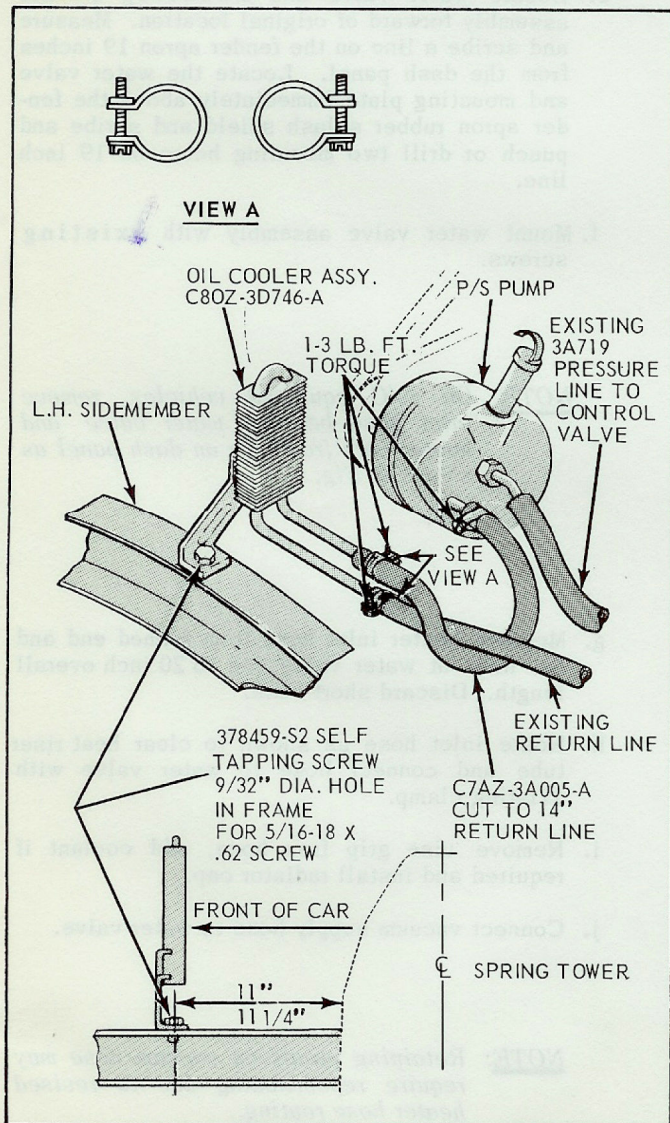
Power Steering Oil Cooler Assembly 9033A
